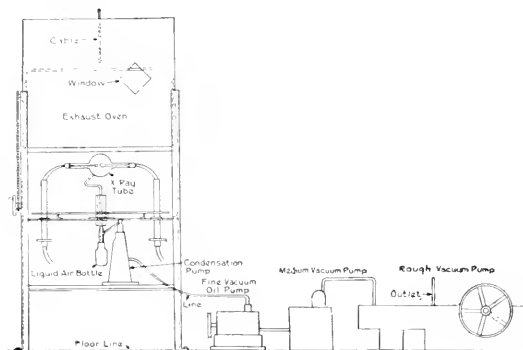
OVEN AND EXHAUST SYSTEM FOR EXHAUSTING X-RAY TUBES.
